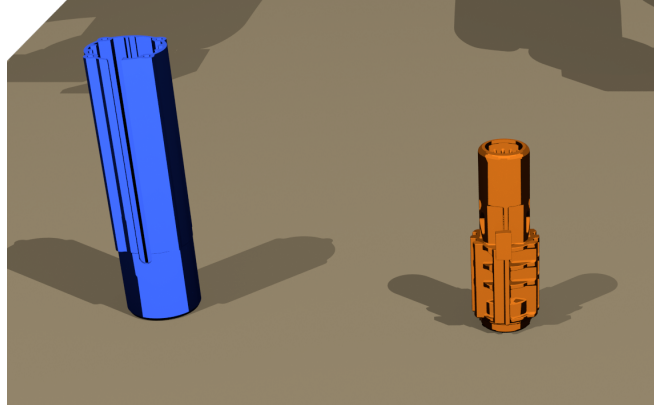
Shows the desired pose of the parts before assembly. Part A (right) is to be assembled into part B (left).
